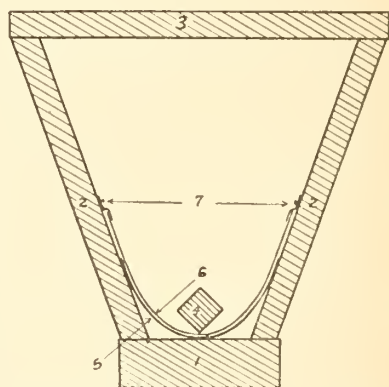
Cross section of the box of the land-plaster distributor shown in figure 6: 1, bottom; 2, sides; 3, top, or lid; 4, square shaft that revolves in the bottom of the box; 5, stationary sheet of galvanized iron; 6, movable sheet of galvanized iron; 7, cleats that hold the upper sheet of galvanized iron in place.
